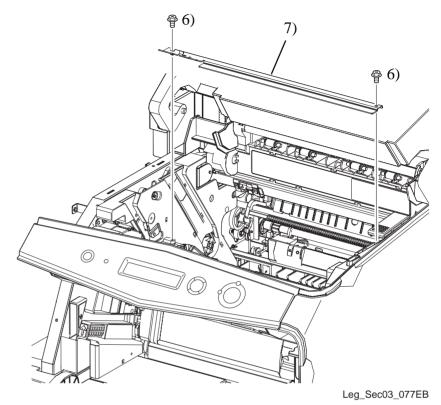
Removal of GUIDE CRU ASSY D (1)
